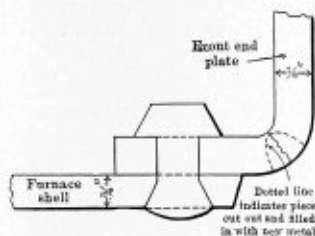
SHOWING METHOD OF FILLING AND WELDING CRACKS.
